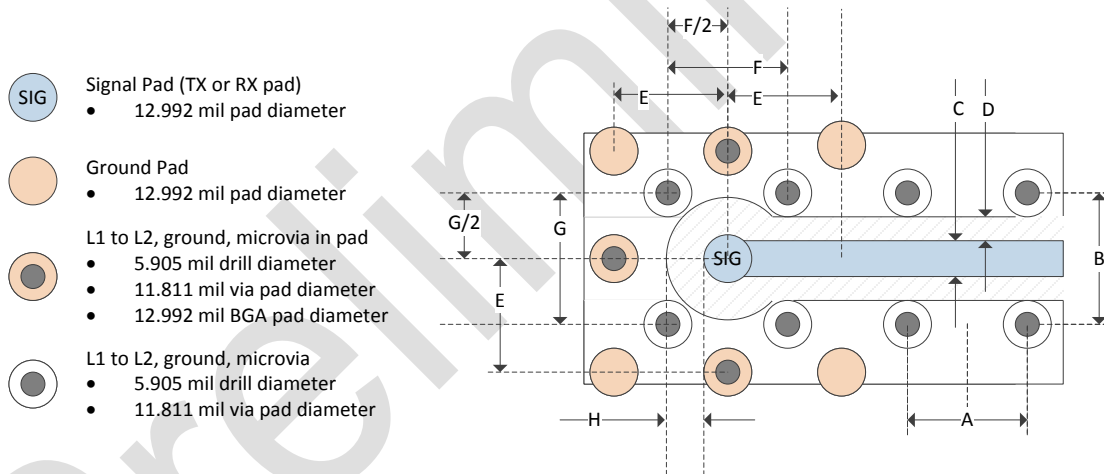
AWR1642 RX1 BGA to PCB transition and GCPW fan out excerpt from RO3003 microprobe layout
